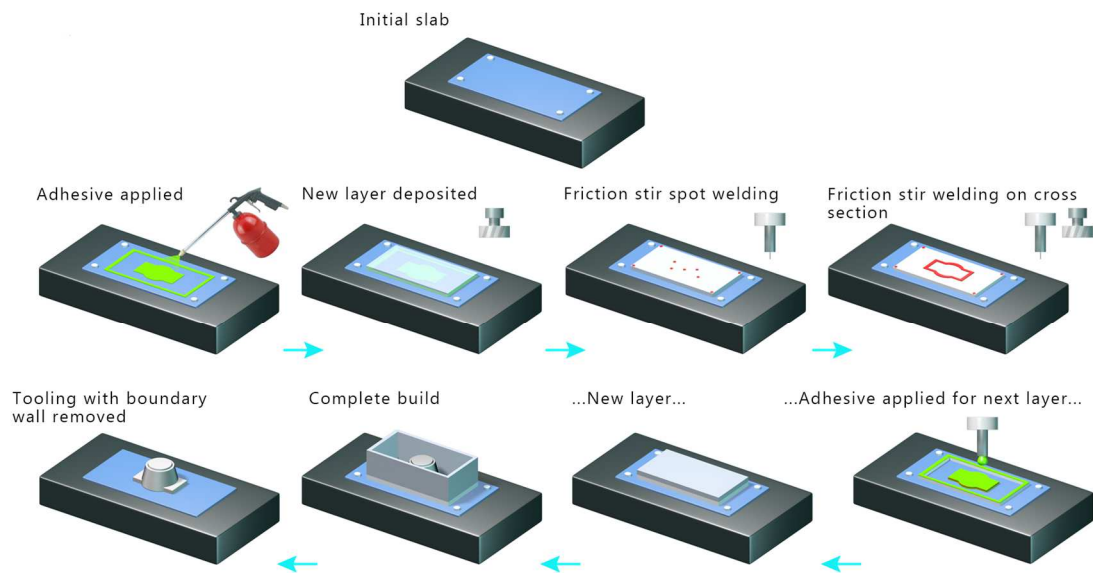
Schematic diagram of friction stir welding based manufacturing system [6]
